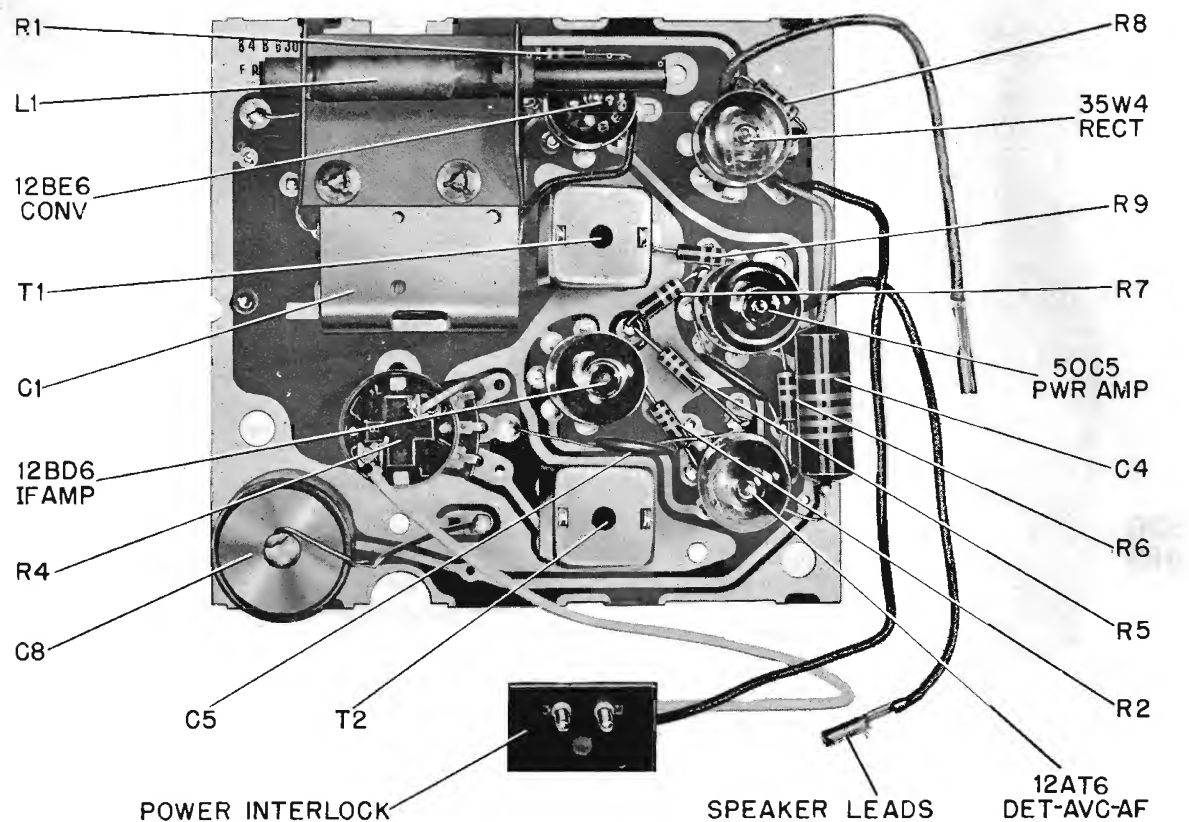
FRONT VIEW OF CHASSIS-WIRED AND BLANK
